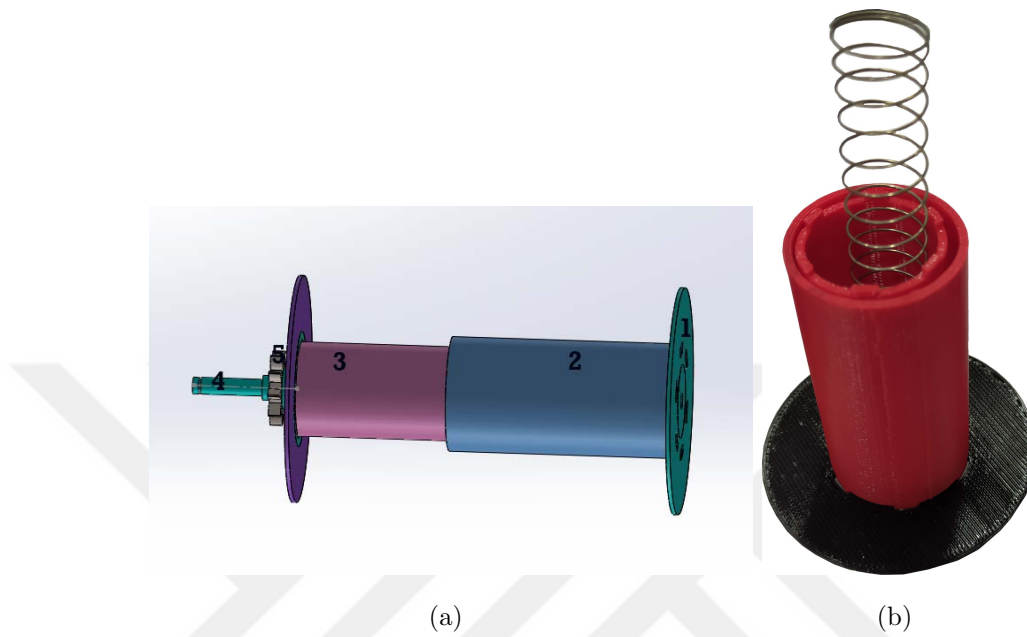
(a) Wheel inner mechanism SOLIDWORKS files : 1: Lid, 2: Spring Guider for Lid, 3: Spring Guider for Hub, 4: Hub, 5: Gear (b) Printed lid, Lid Spring Guider, Hub Spring Guider and assembled spring
